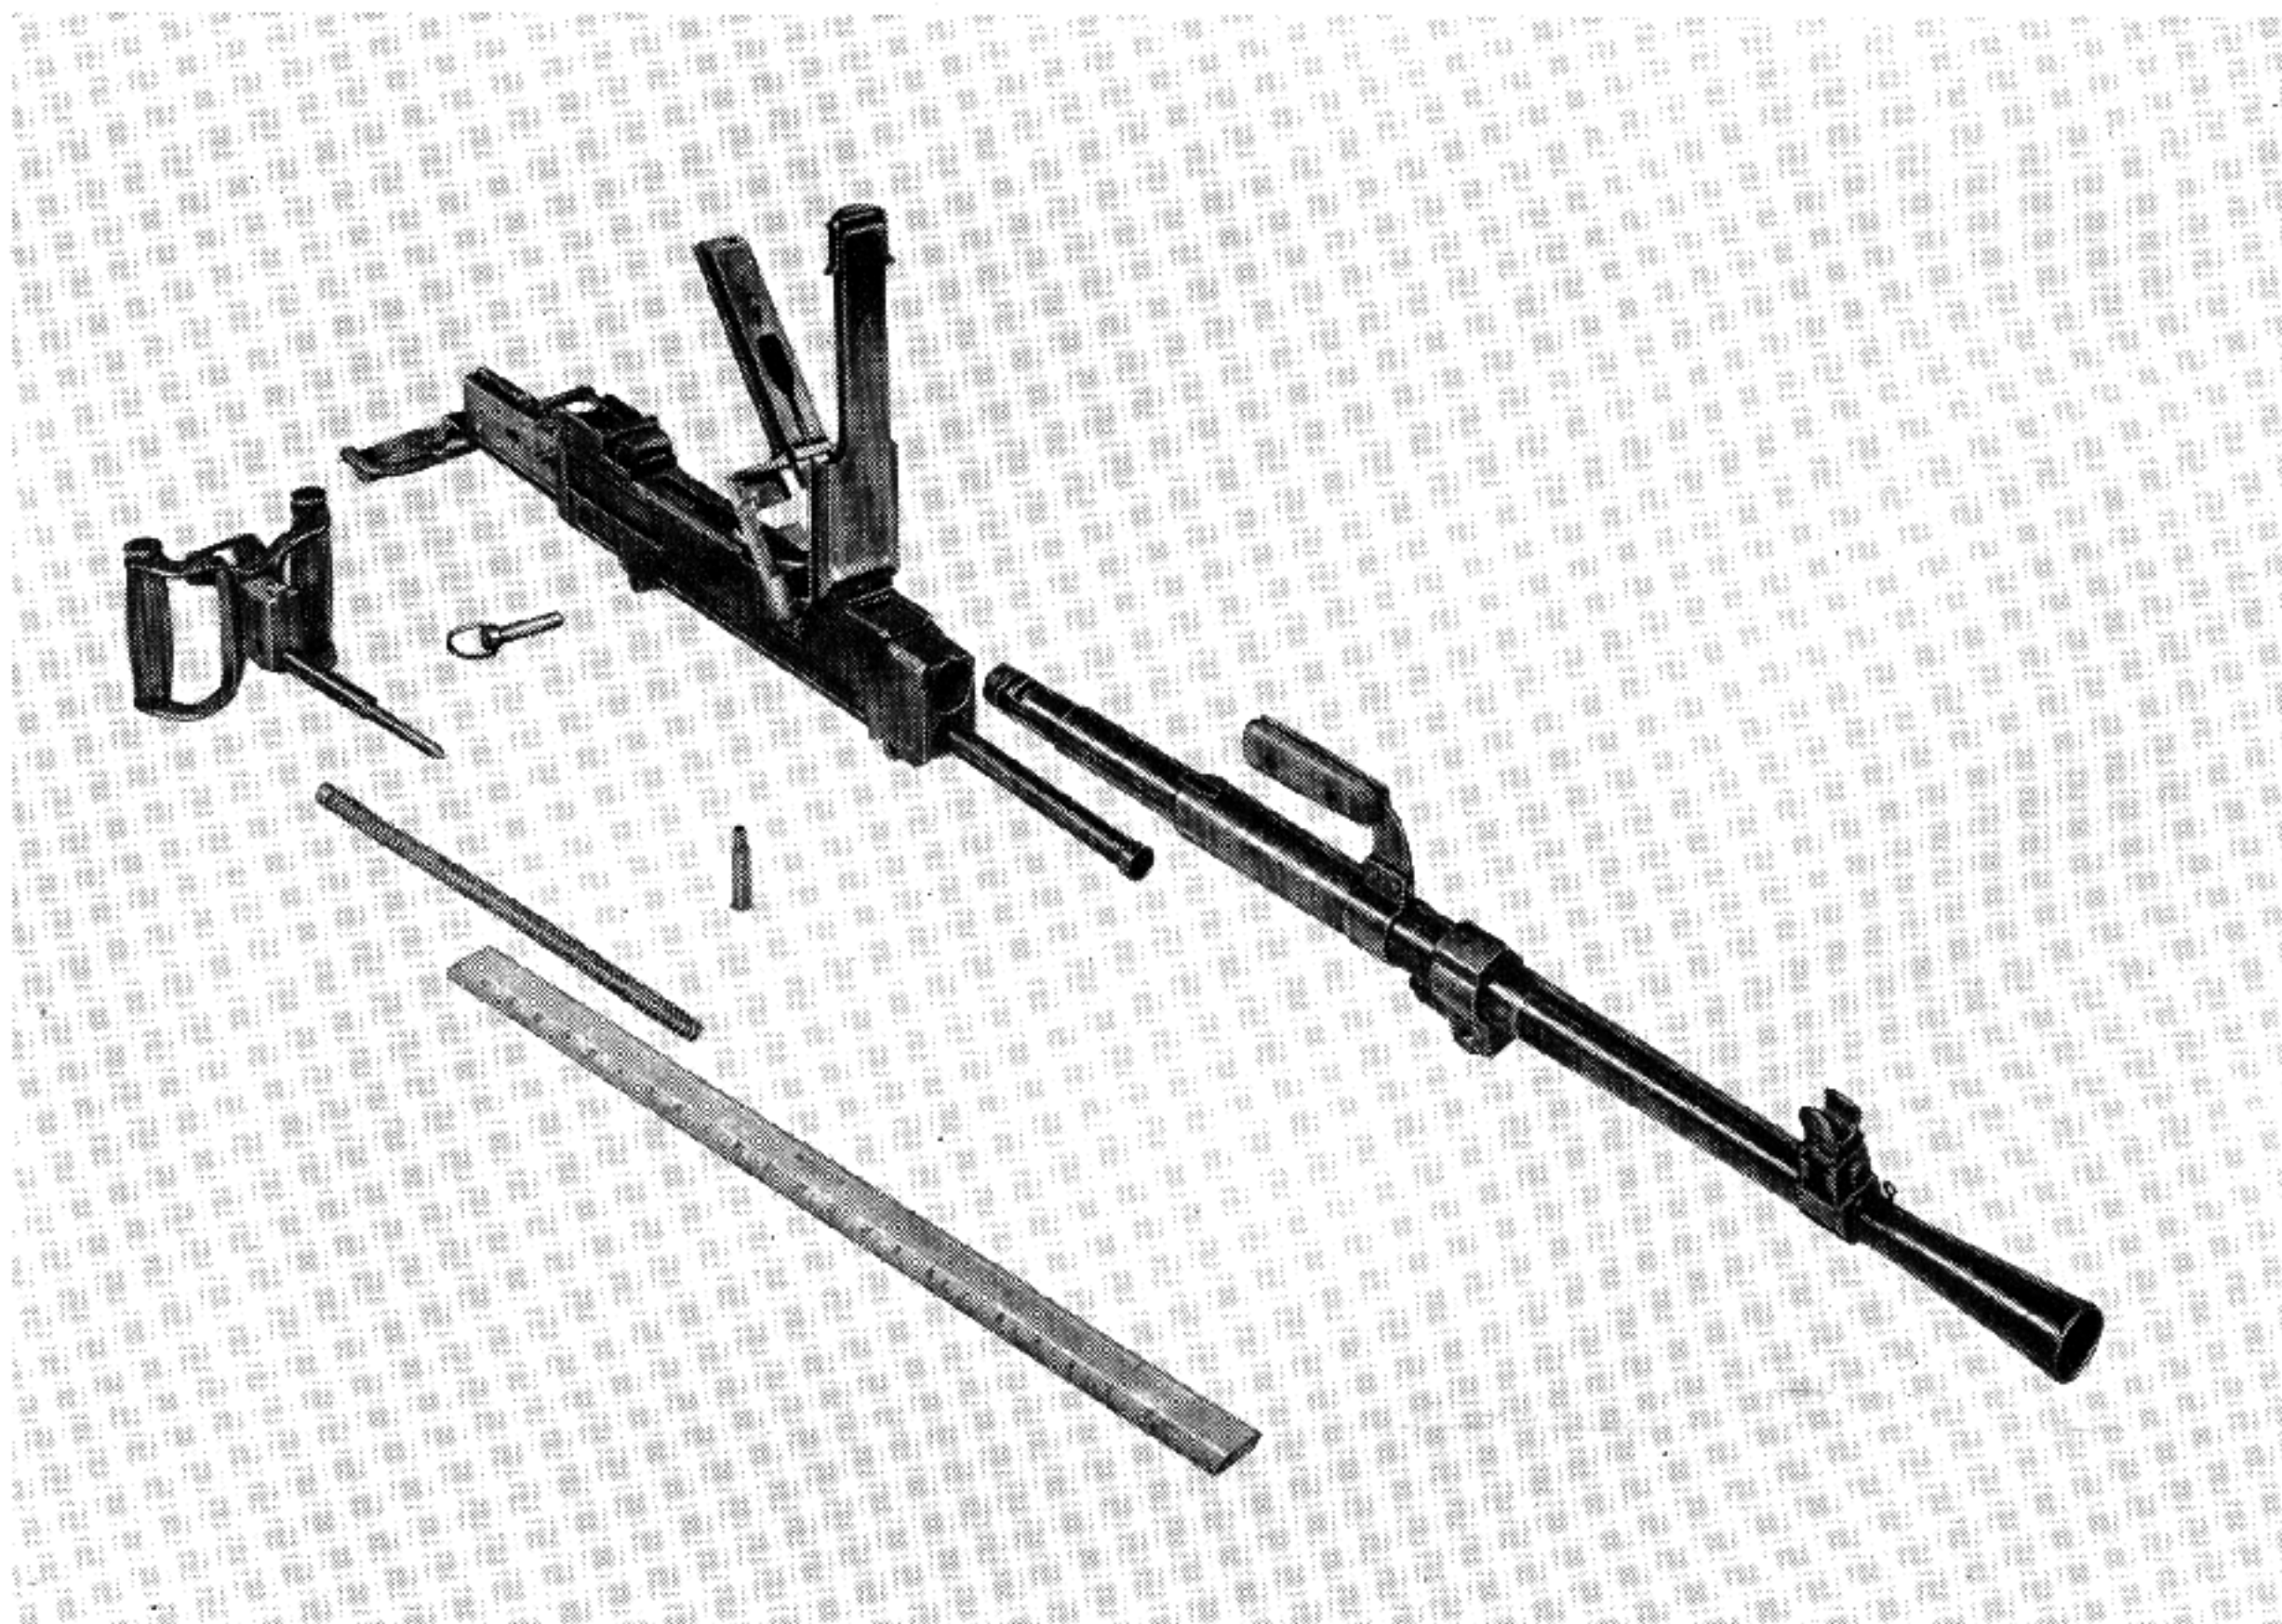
Stripping the SG-43, continued. The backplate group and the mainspring have been removed. The recoiling parts have been started out the rear by a pull on the retracting handle.
